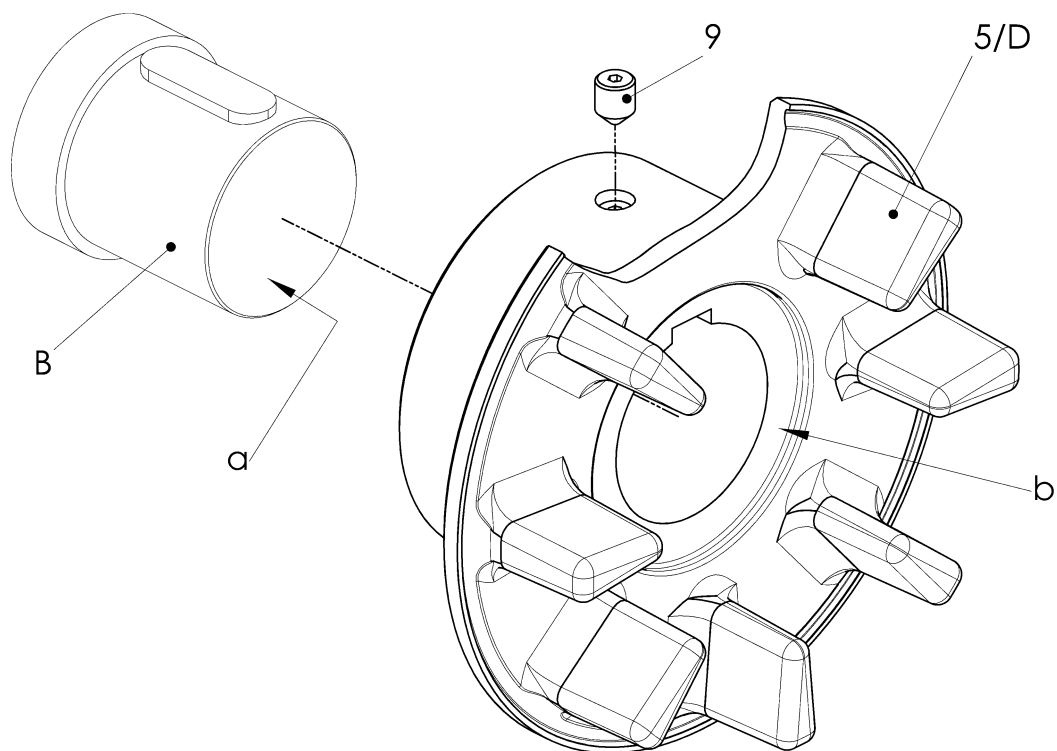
Mounting the inner part (5/D) with cylindrical bore and keyway
